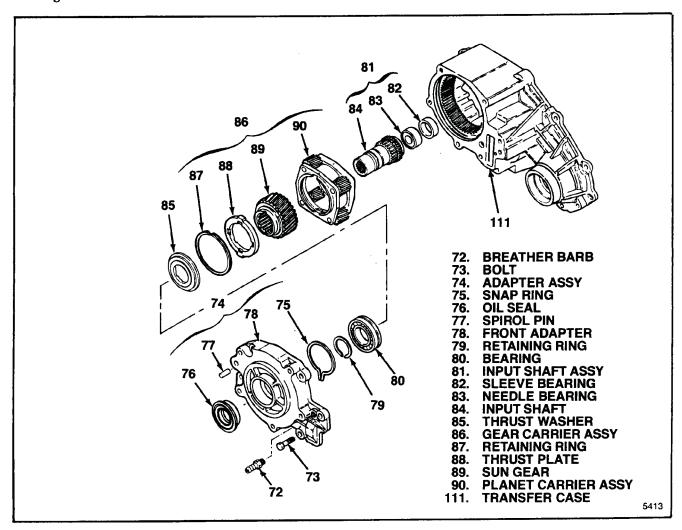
Adapter, Input Shaft and Gear Carrier Group
